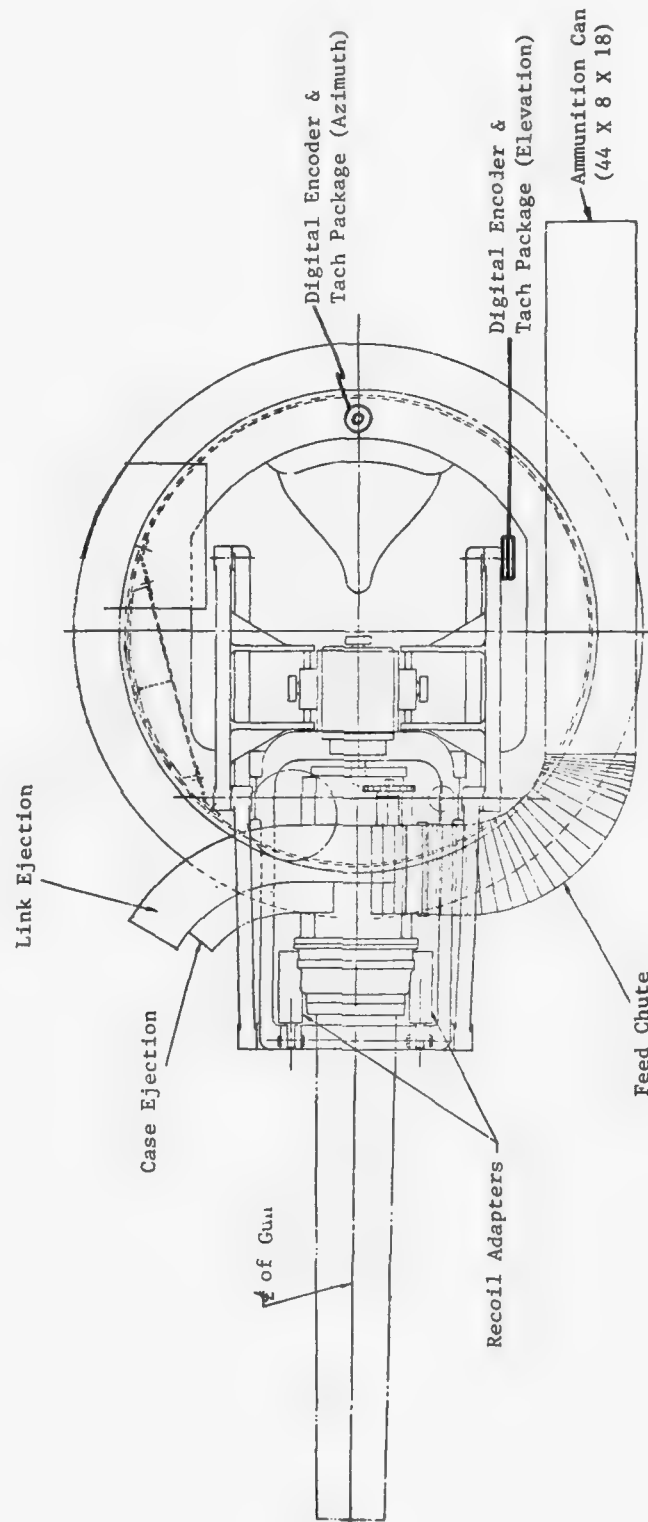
Mounting of Gun/Turret Sensors (Plan View)
